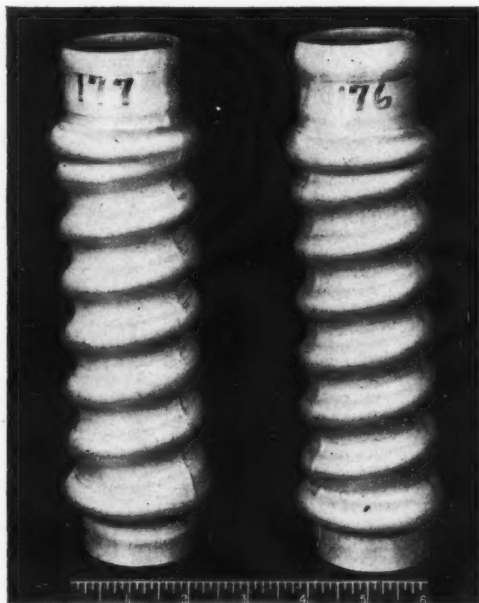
Complex parts, such as these cooling jackets, have been explosively formed from nickel, 321 stainless steel, Inconel X, 20 CB aluminium, and zirconium
